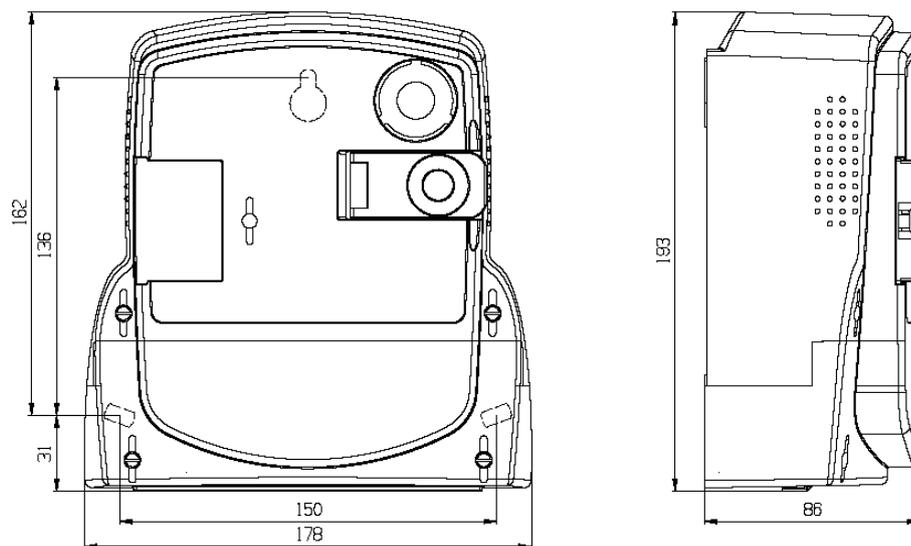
Overall and fixing dimensions of an MT381 meter fitted with a short terminal cover
